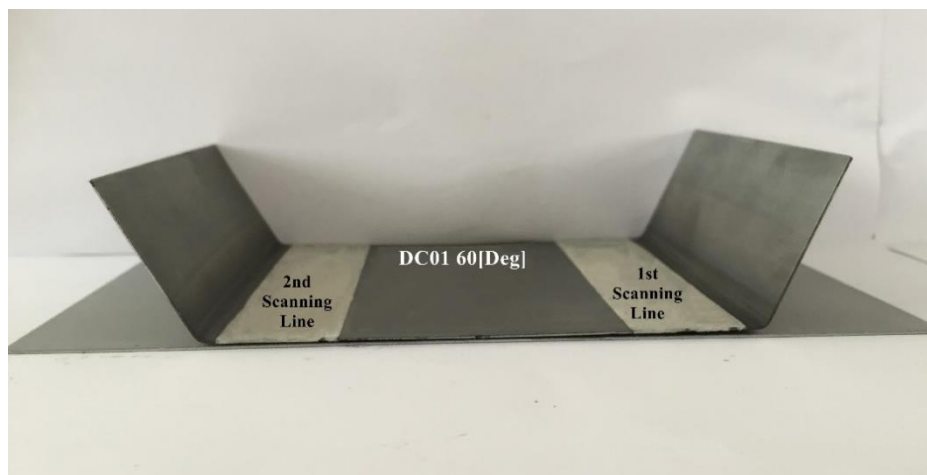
Mild steel DC01 final formed “U” shape component with 60° bending angle
